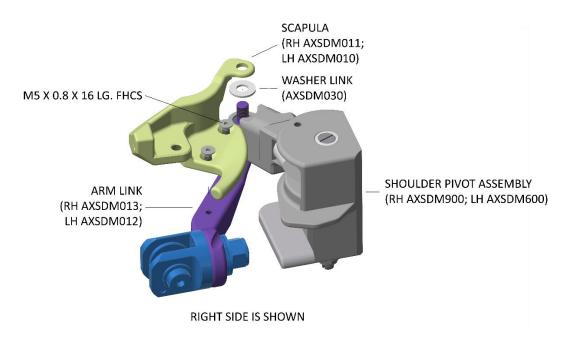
Insert Arm Link into Shoulder Pivot Assembly
